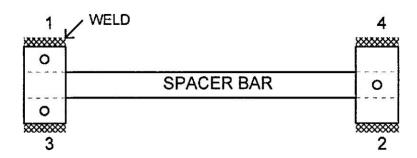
WELDING SEQUENCE FOR THE MOUNTING BLOCKS
